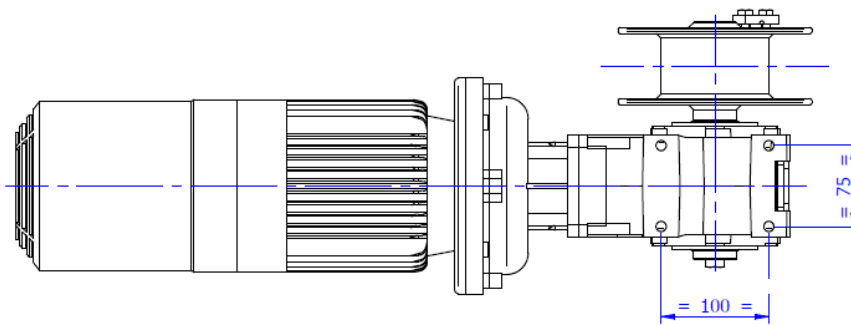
Bottom view of electric motor (source: EMCÉ WINCHES®)
